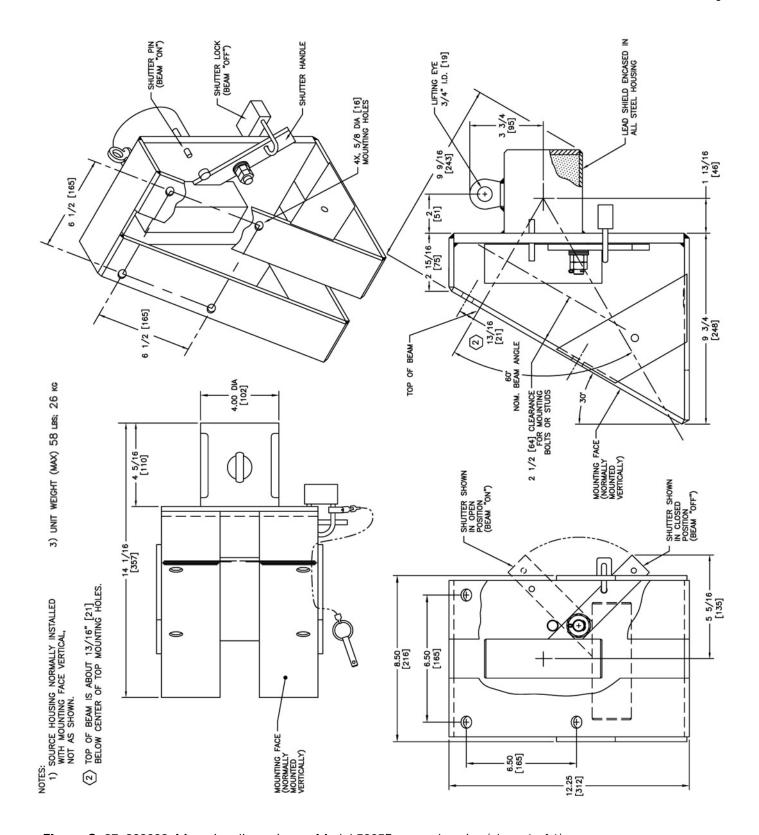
868628: Mounting dimensions - Model 5205B source housing (sheet 1 of 1)
